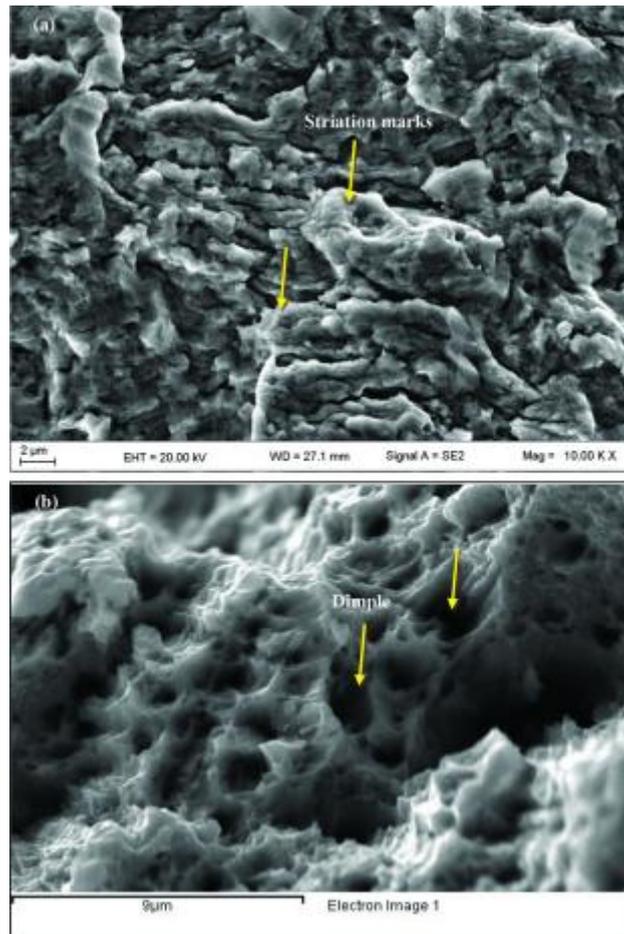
a) striation indicating fatigue; b) dimples indicating ductile fracture [141]
